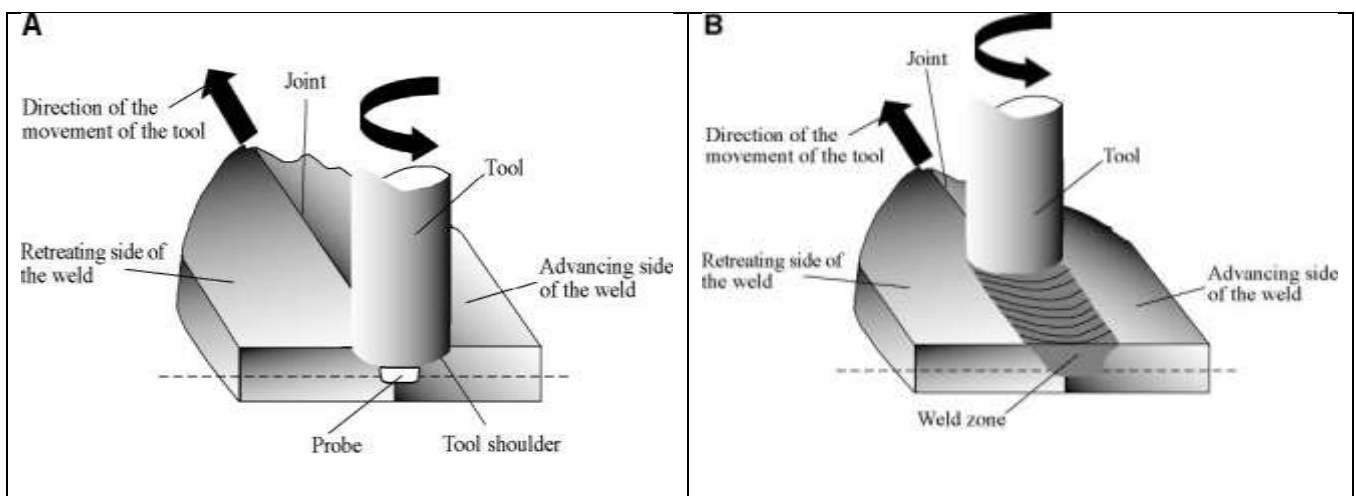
Schematic drawing of FSW. Two materials to be welded affixed to one another such that the connection path is crossed by the probe (A), Exposed portion of the sample to the welding process and heating caused by the shoulder (B).
